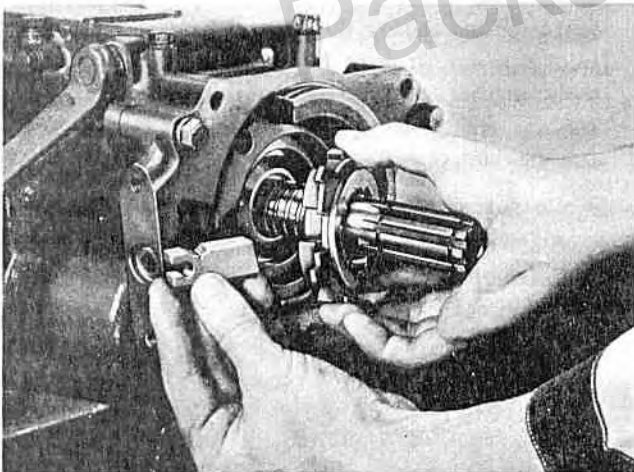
Installing the Stationary Gear Plate and Sliding Pawl
